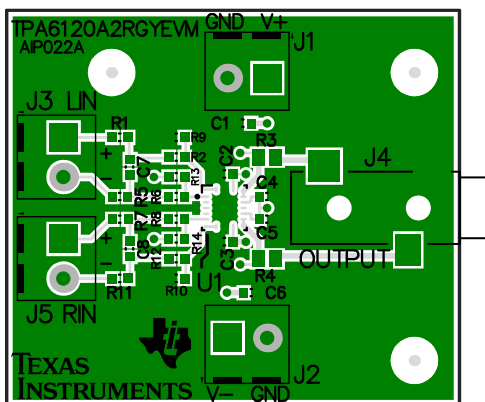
Example PCB Layout, Top Layer and Silkscreen, Top View
